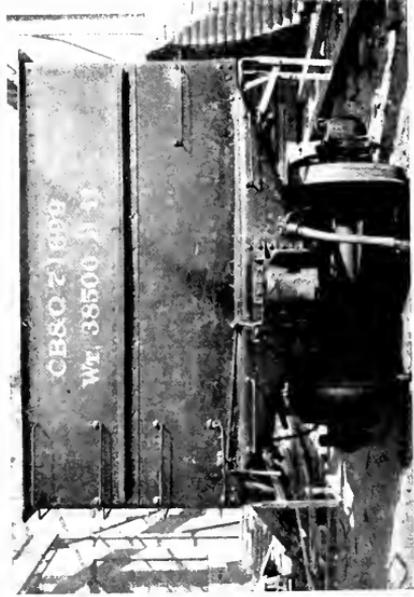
One of the Main End Sheets. The bath tub section stiffener across the center of the sheet was spot-welded in place as well as the top chord angle, as indicated by the arrows in Fig. 7
